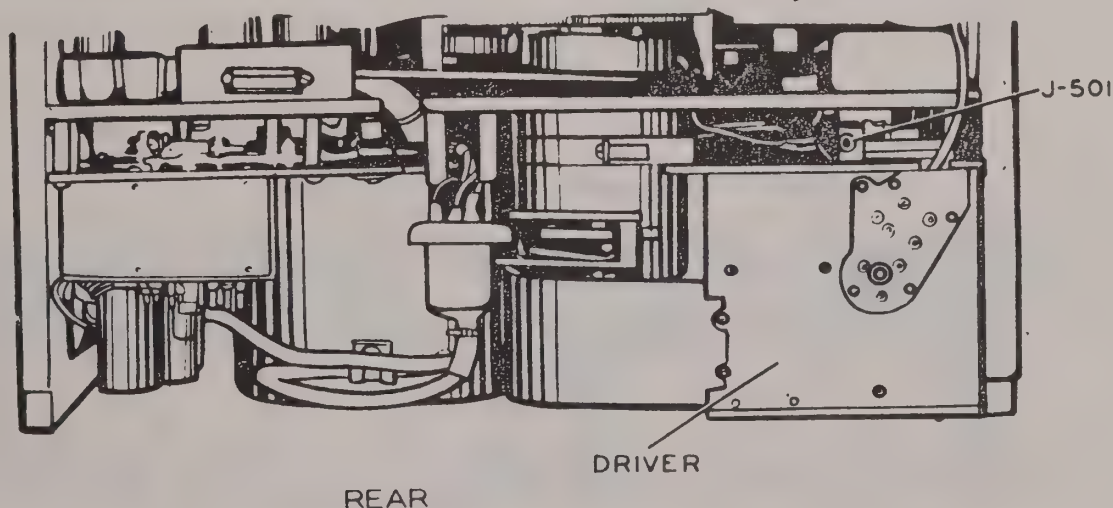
Radio Transmitter T-217A/GR, Partial Bottom View, Cover Removed.
